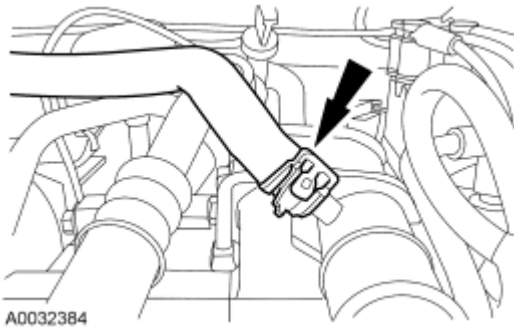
Locating A/C Compressor Electrical Connector
